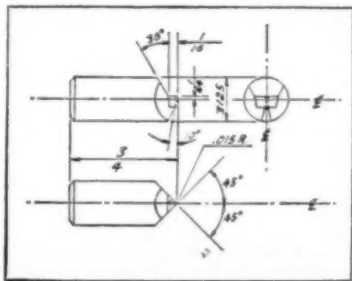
Fig. B. Shaped Diamond Boring Tool in one of its simplest forms. The Diamond has a 90 degree included angle—10 degrees clearance down the front—and a .015 in. radius on cutting edge. This type of tool should do a very satisfactory job on a large percentage of applications suitable for Diamond Boring. Factors such as spindle speed, feed per rev., and amount of stock the user intends to remove, as well as size of hole itself, make it necessary to deviate from this simple shape in many cases. Hence, before we know it, innumerable designs crop up and naturally this makes the subject of Shaped Diamond Boring Tools seem more or less complicated to the average layman.
